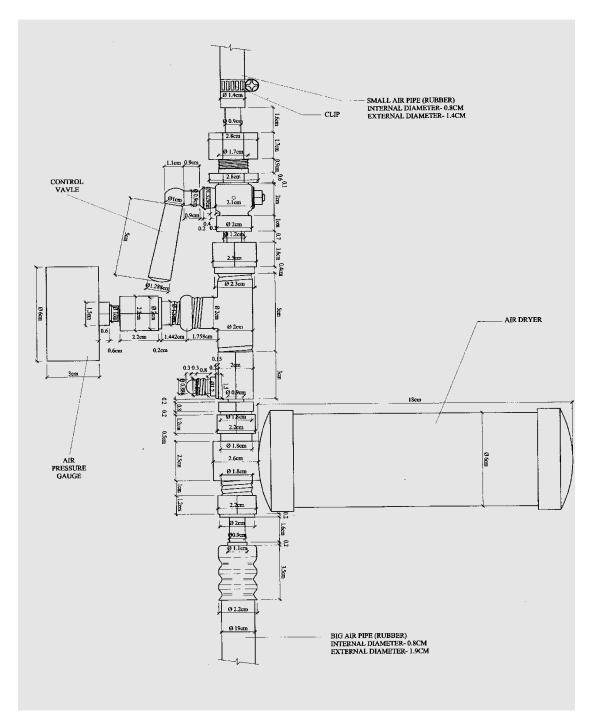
Fuel economizer mechanism with air dryer and valve control
